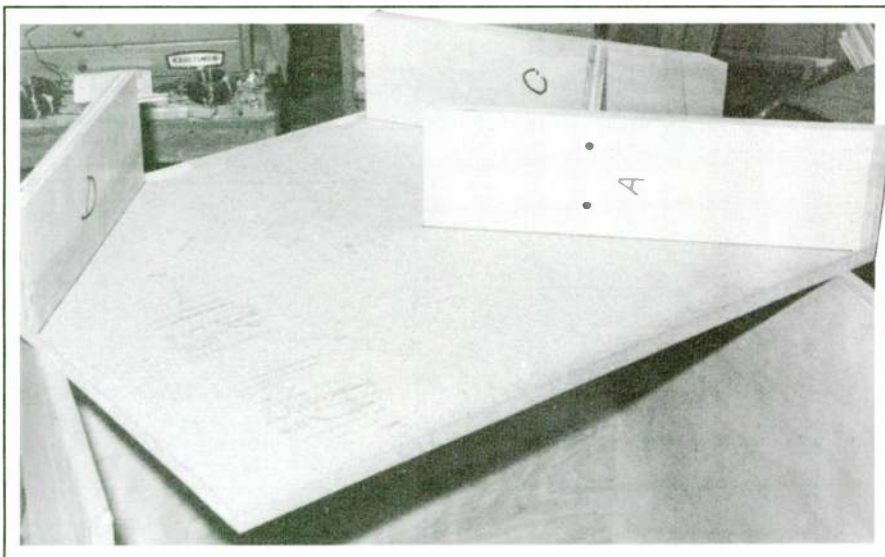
Parts A, B, C and D on the underside of the top board.
